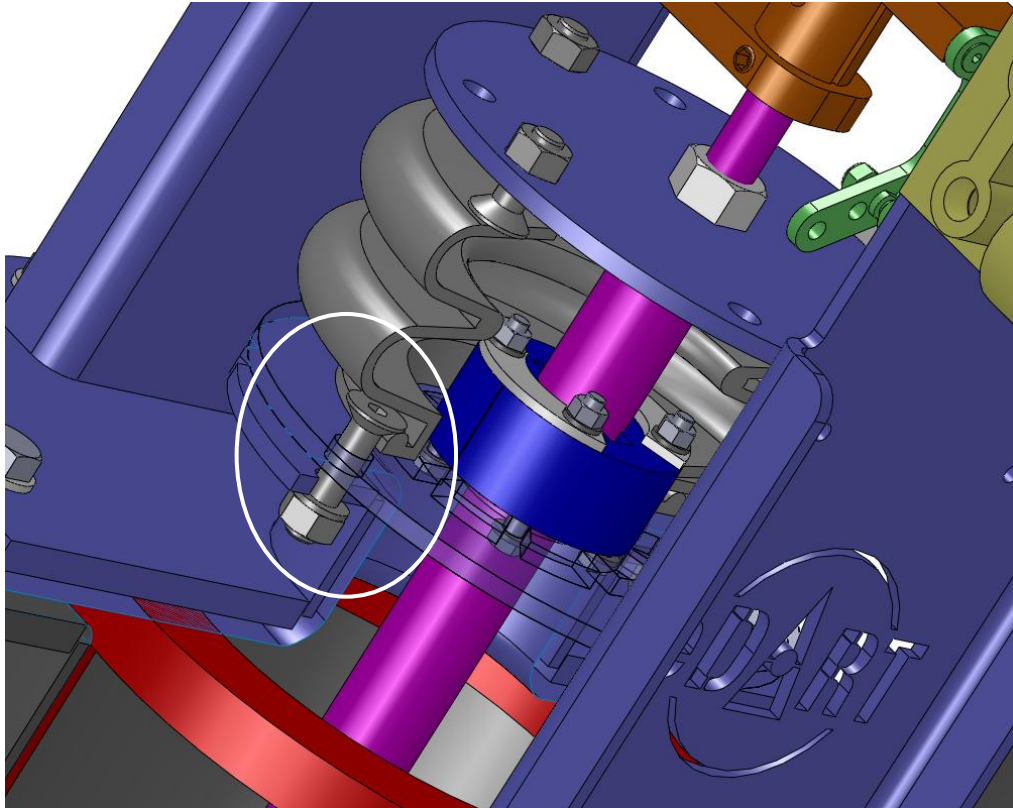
Partial section through bonnet showing location of guides and indicating the bolts to remove in order to gain access.
